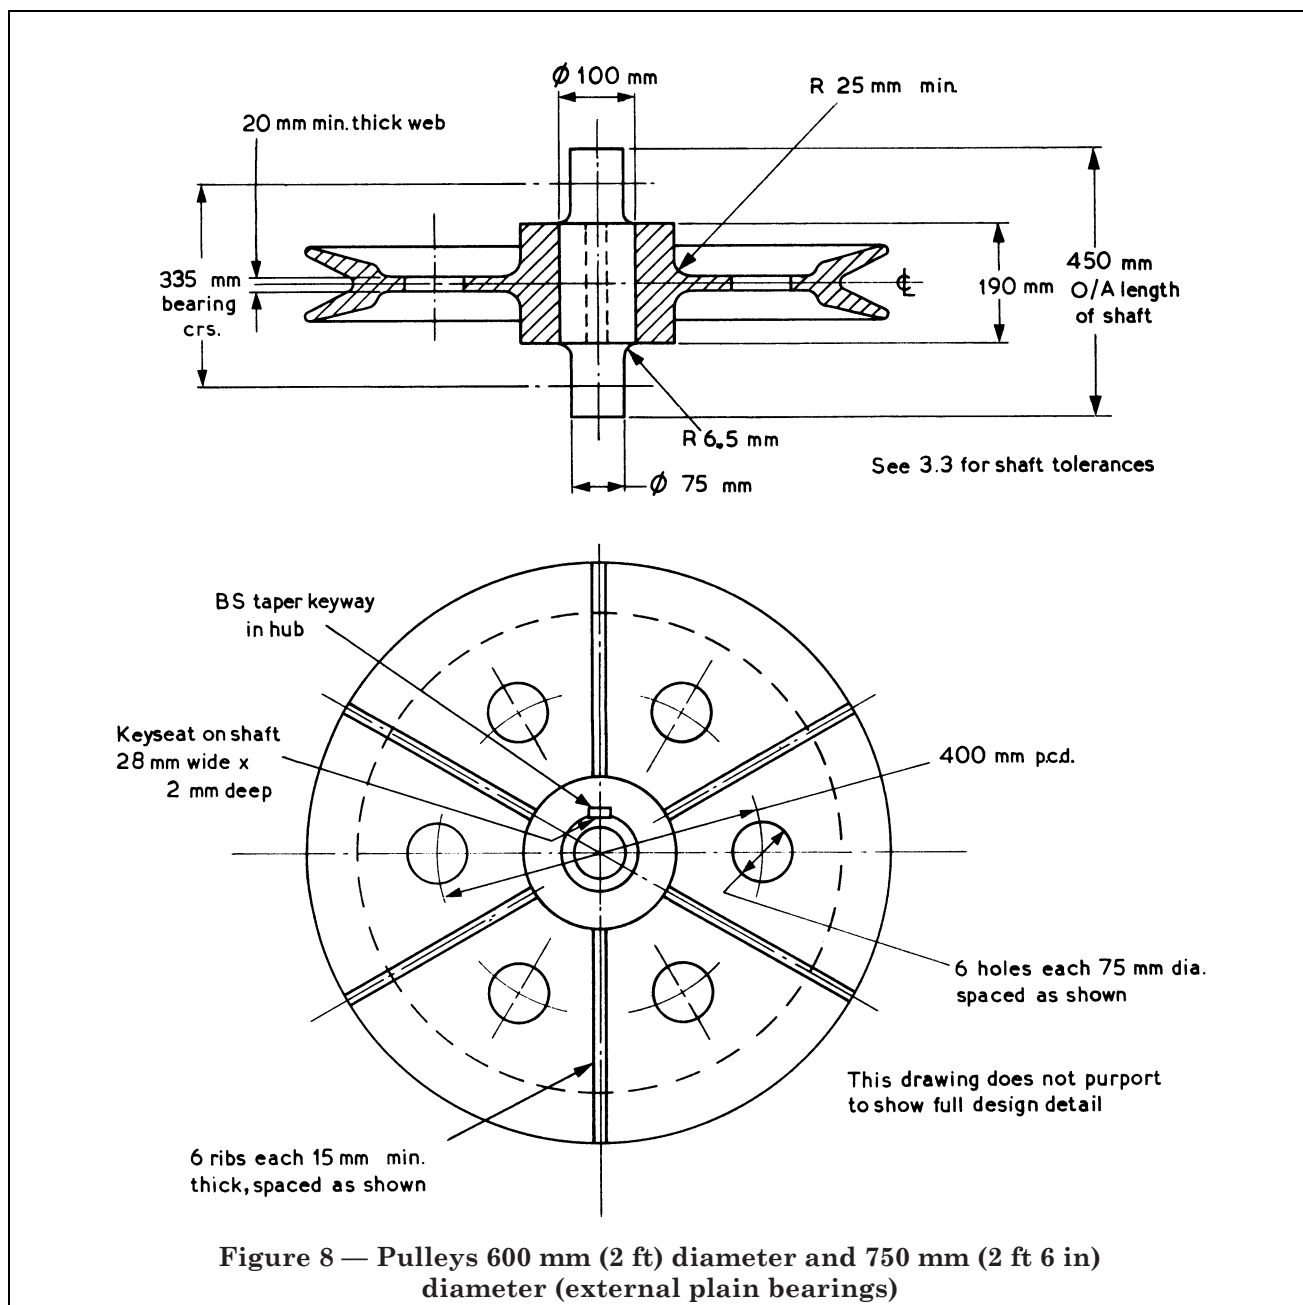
Pulleys 600 mm (2 ft) diameter and 750 mm (2 ft 6 in) diameter (external plain bearings)
